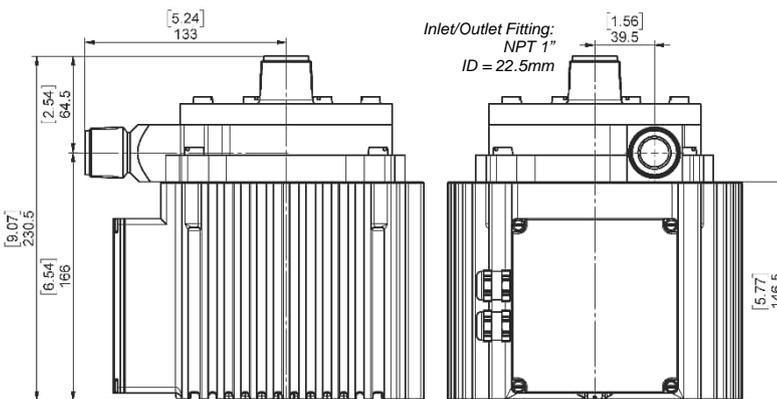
Dimensions of motor with pump head LPP-2000.4 (PVDF Housing, PFA Impeller)
